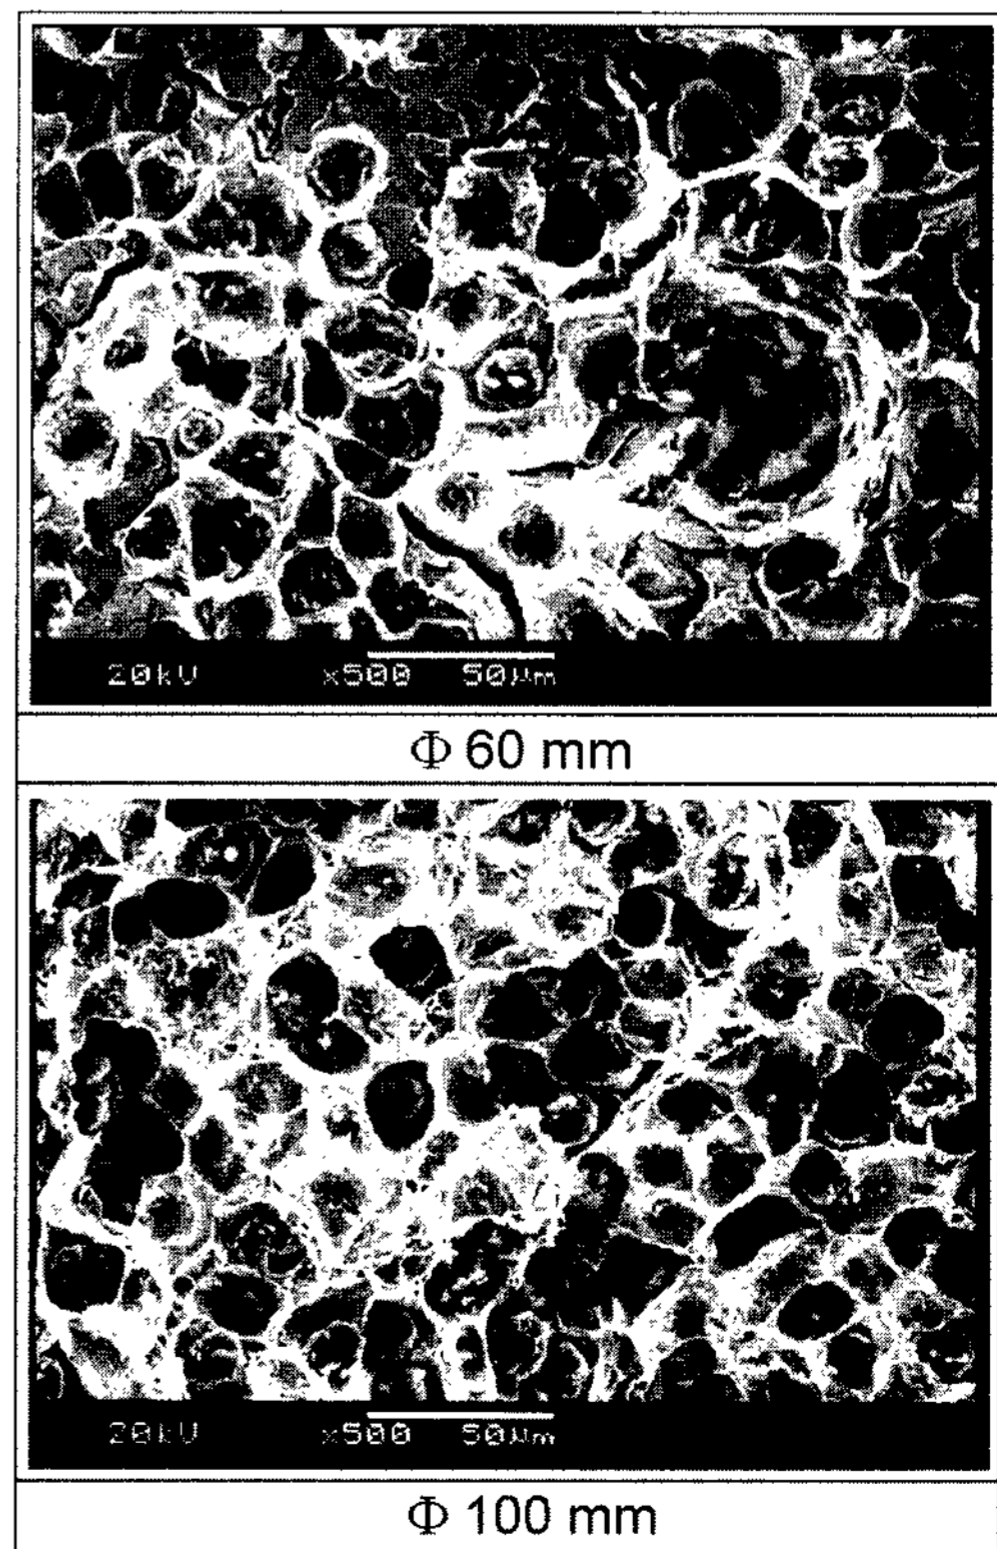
SEM morphology of fractured surface of continuous cast tensile specimen.
